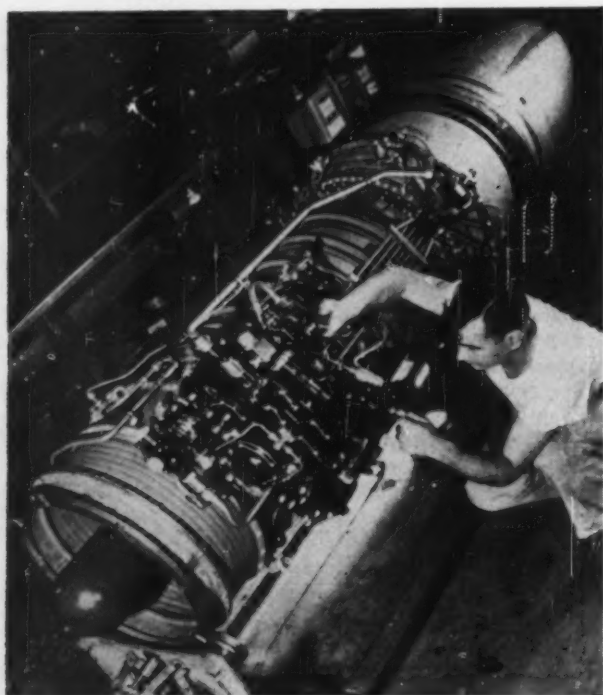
TURBOJET AIRCRAFT ENGINE IN FINAL ASSEMBLY FIXTURE
